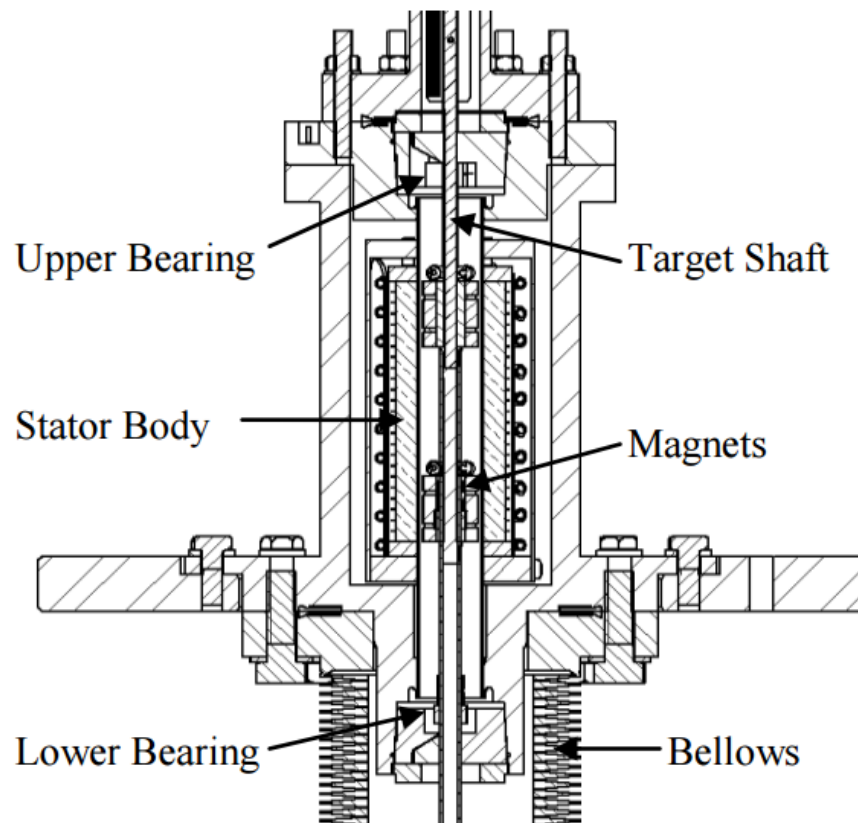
Schematic of the target. Actuation is achieved through the stator coils and magnets.[5]
